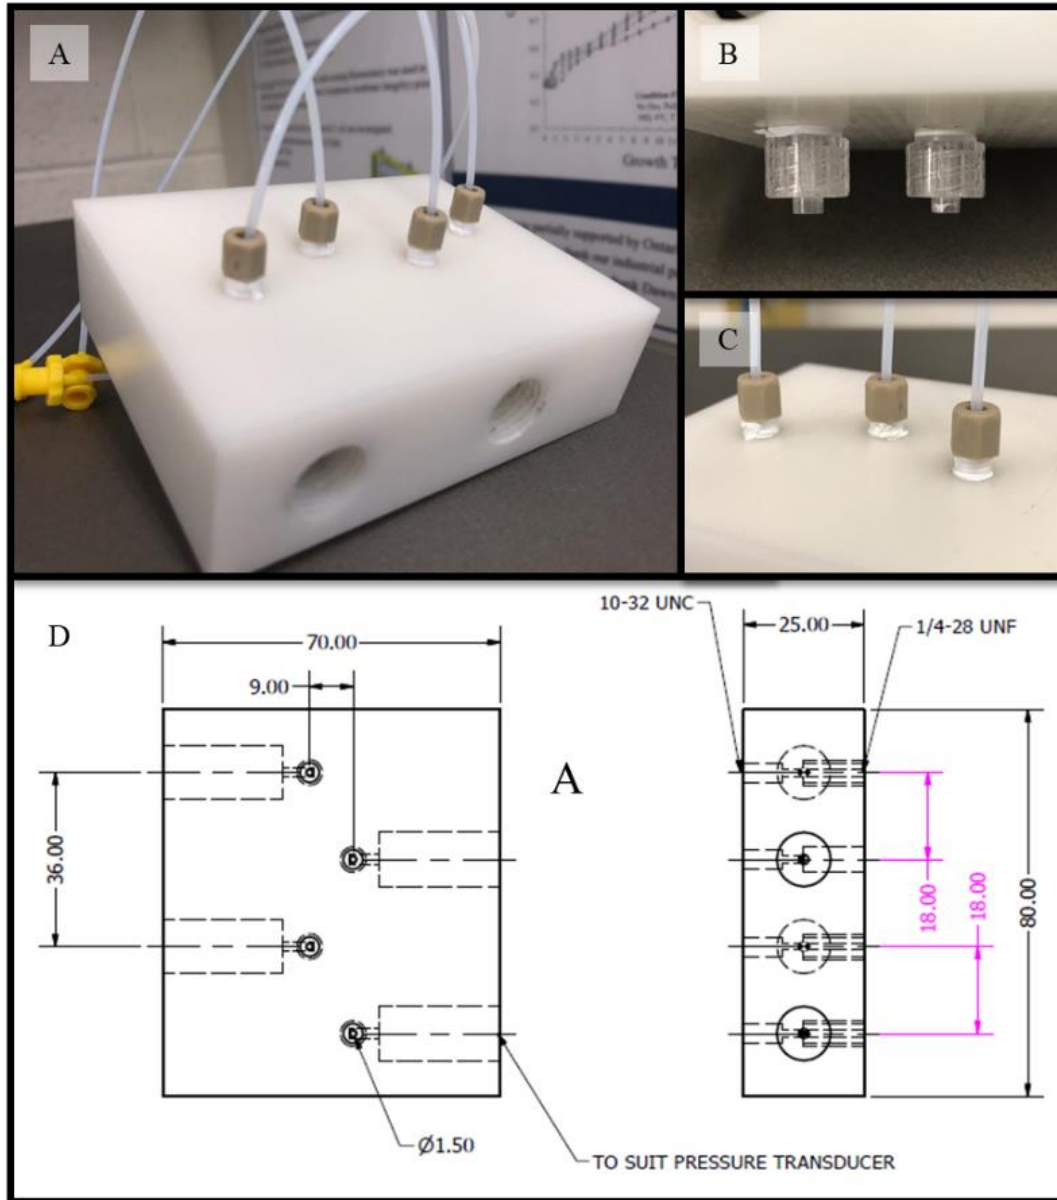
Panel A: picture demonstration of the high throughput module. Panel (B) and (C): proper fluidic connectors at bottom and top of the module respectively. Panel (D): technical drawing of the high throughput module. Note that the preliminary design was for performing four parallel filtration experiments. Only three of the channels were used in the study conducted in the third chapter.
